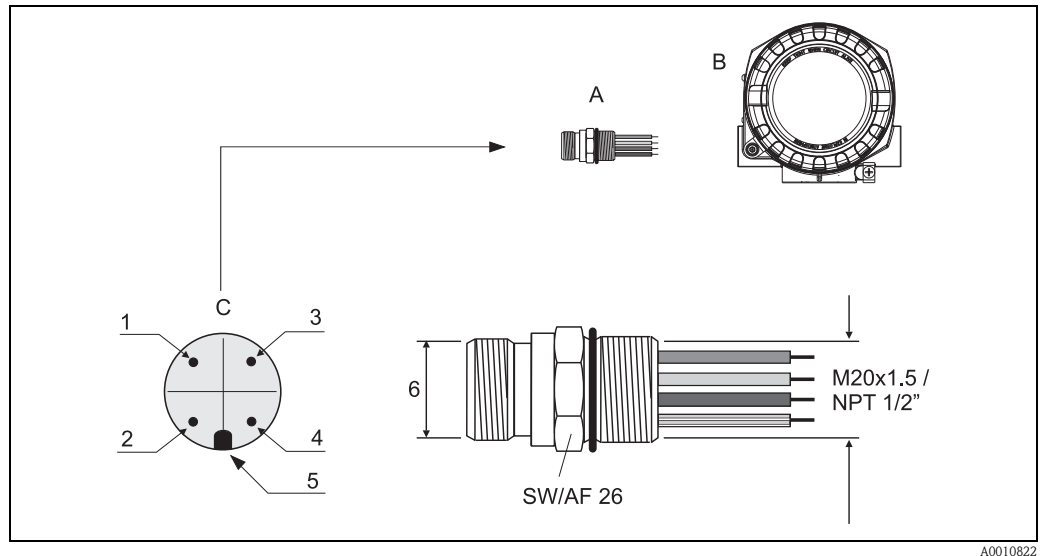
Connectors for connecting to the FOUNDATION Fieldbus
